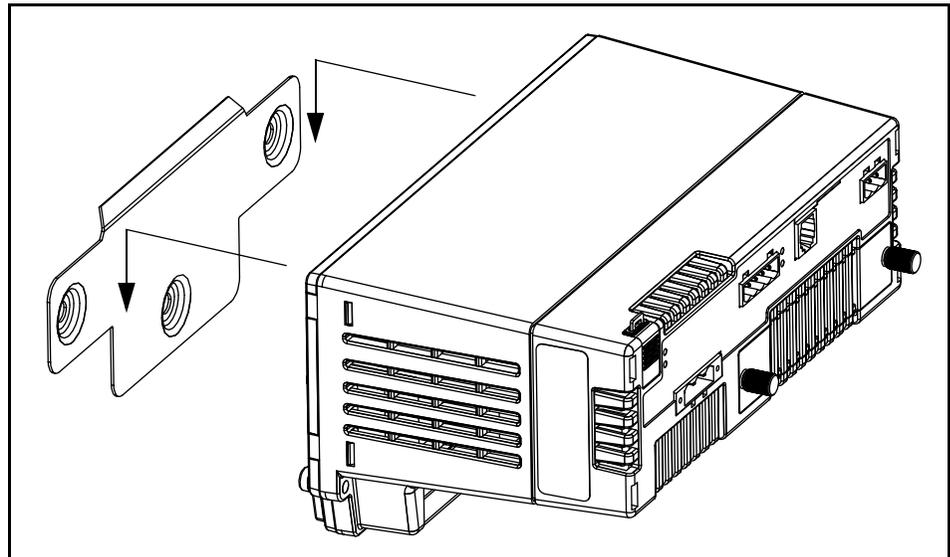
Attaching the CM3000 to the Mounting Bracket
